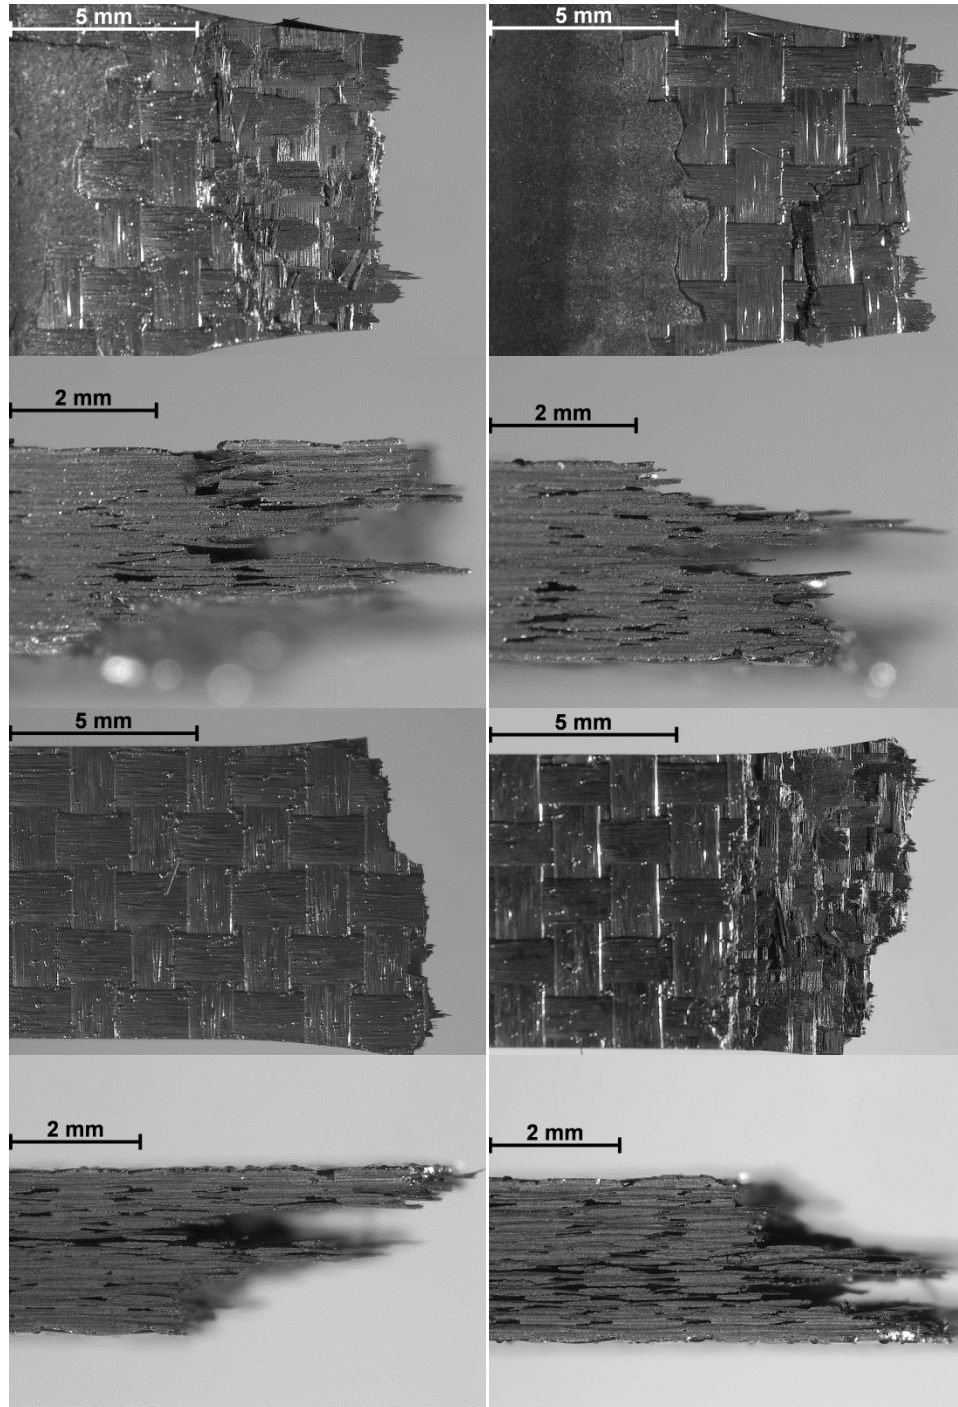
Fracture surfaces obtained in tensile test of virgin C/HYPR-SiC™ specimen (Plate 11126, Specimen 4)
